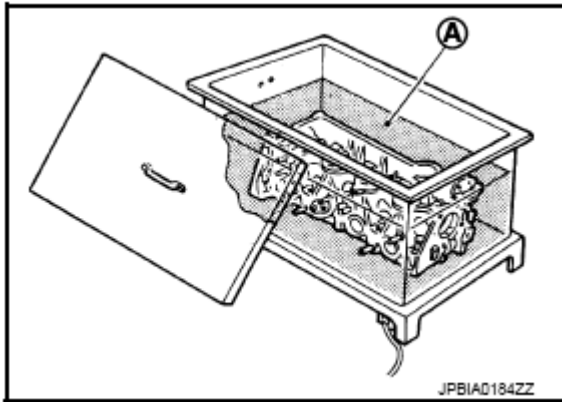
Heating Cylinder Head To Remove Valve Guide
